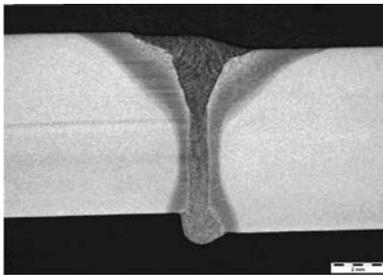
Cross-section through hybrid weld made over joint with 0.8 mm of mismatch, focusing laser 2 mm below top of root face.
